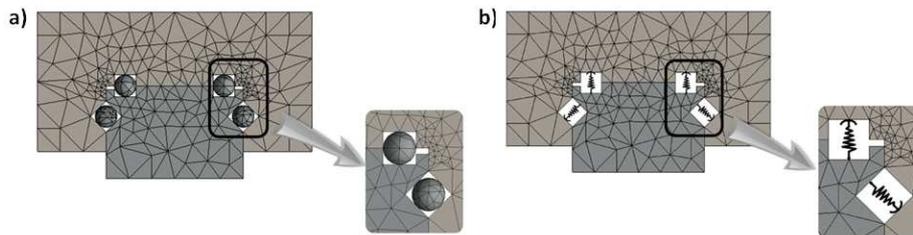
Engineering of: a) ball elements according to deformable finite-element method, b) rolling subassemblies with spring elements
